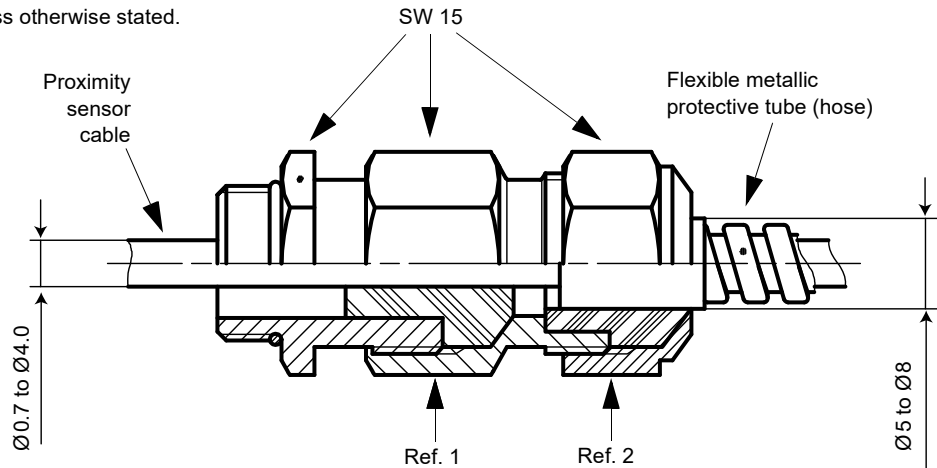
Connecting cables to a SG10x cable feedthrough
